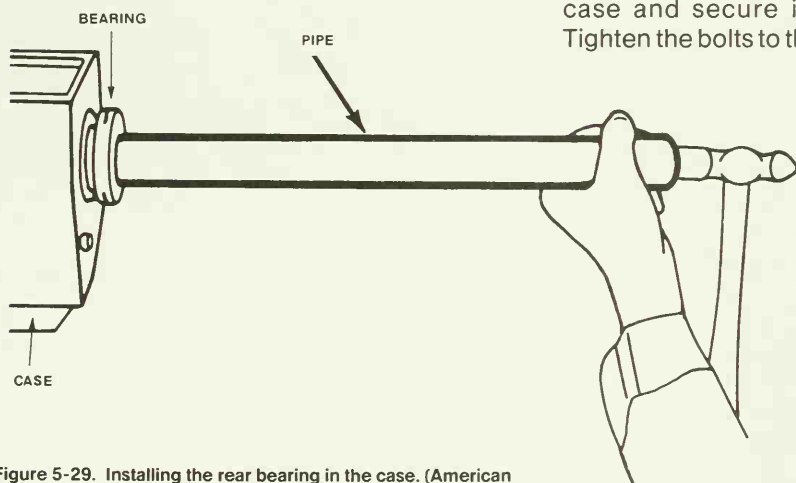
Installing the rear bearing in the case. (American Motors Corporation)
